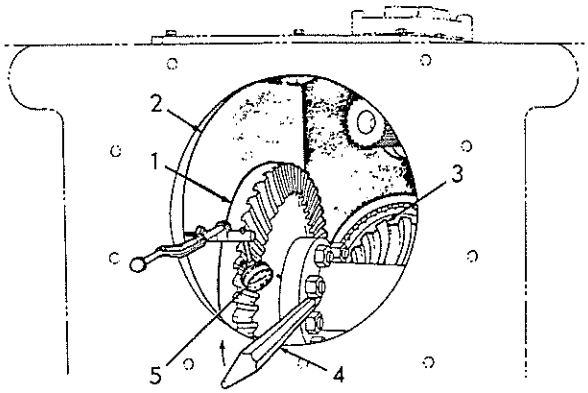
Checking Backlash Between Bevel Gear and Bevel Pinion (T-70855)
